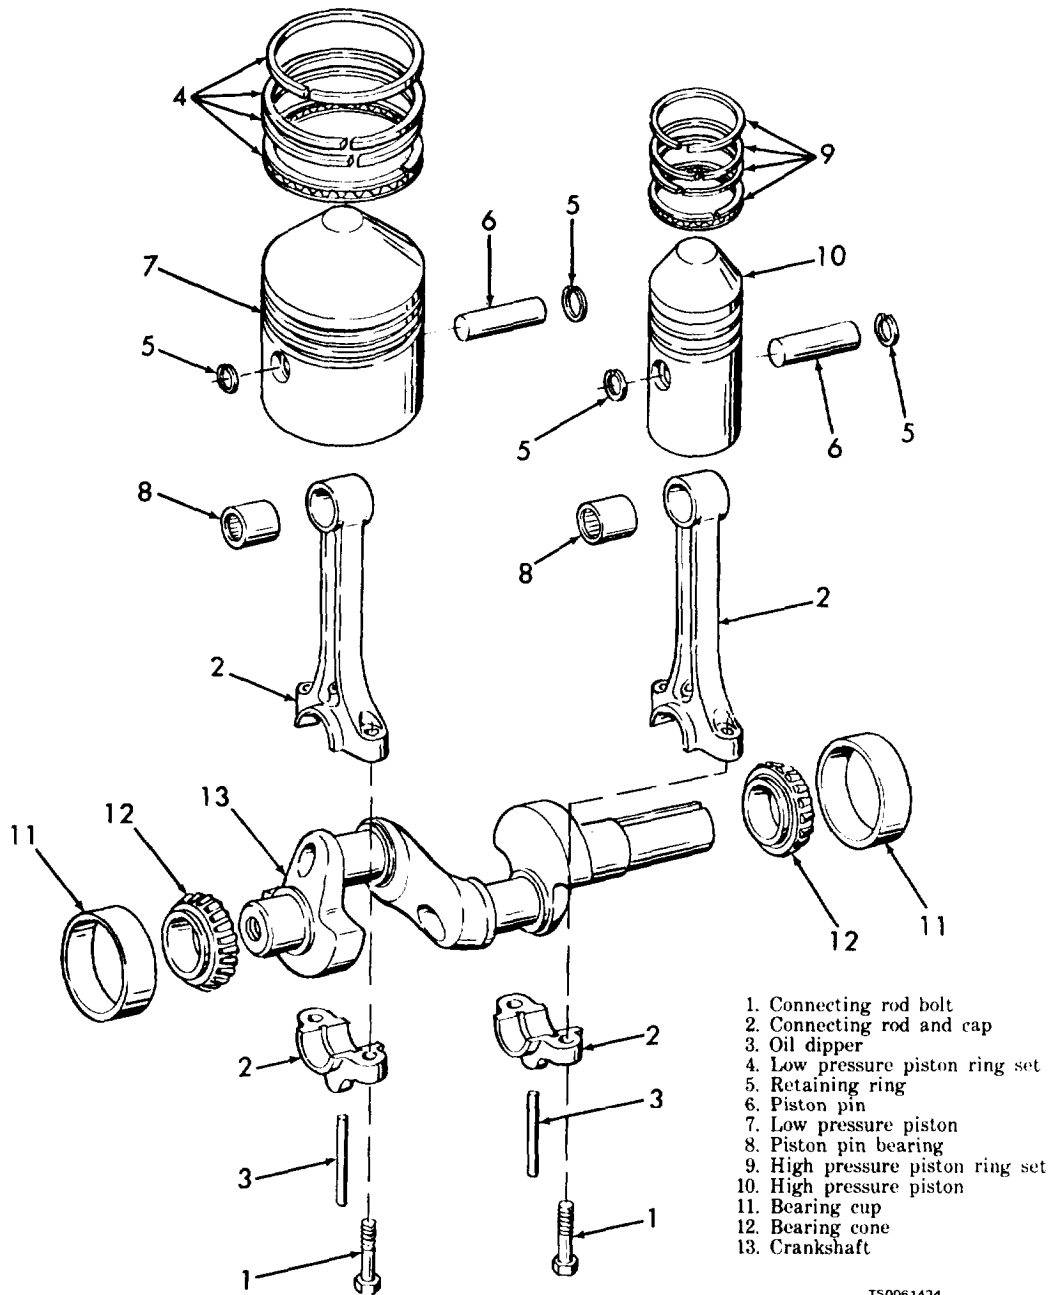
Compressor crankshaft, pistons, and connecting rods, exploded view.
